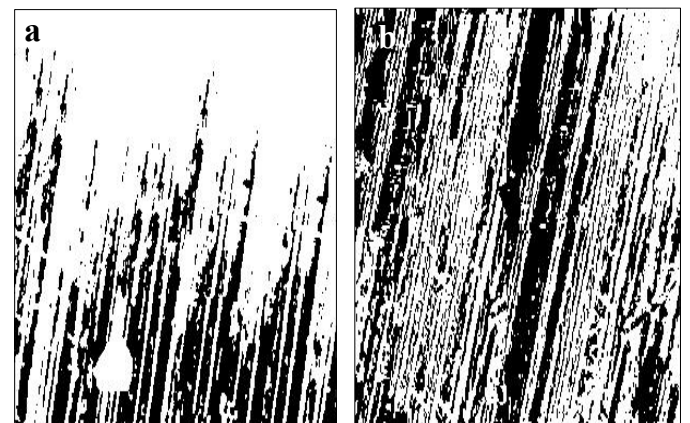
Threshold image of the machined surface of the udimet-705 alloy specimen at 7th run b) 8th run
